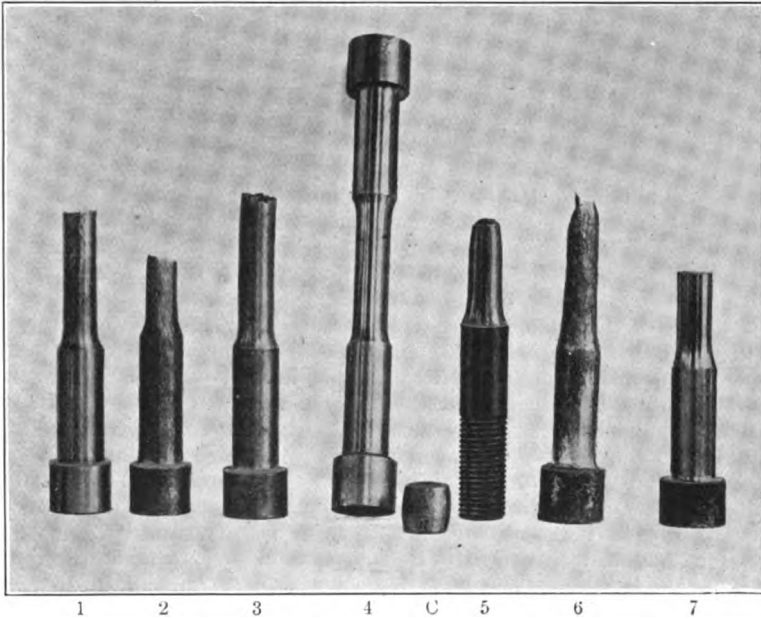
One Crushing (C) and Seven Tensile Test Pieces.
